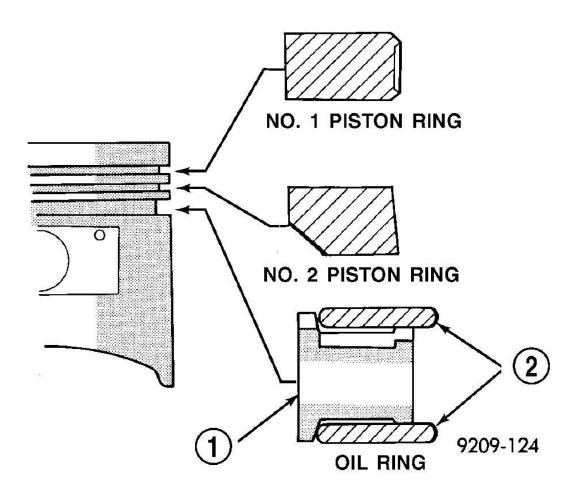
Installing Piston Ring Courtesy of CHRYSLER LLC
